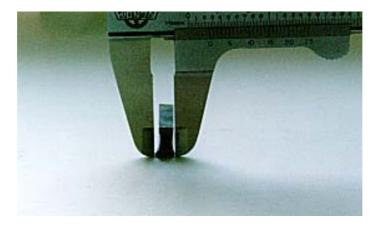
Vernier calipers being used to measure lateral expansion on a 5 mm (½ size) Charpy impact specimen.
